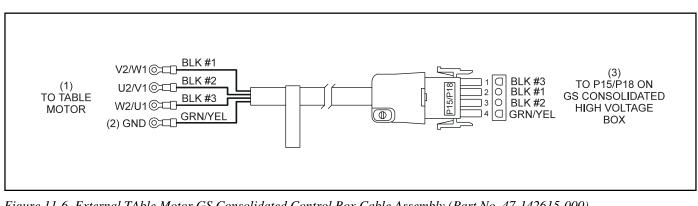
External TAble Motor GS Consolidated Control Box Cable Assembly (Part No. 47-142615-000)
